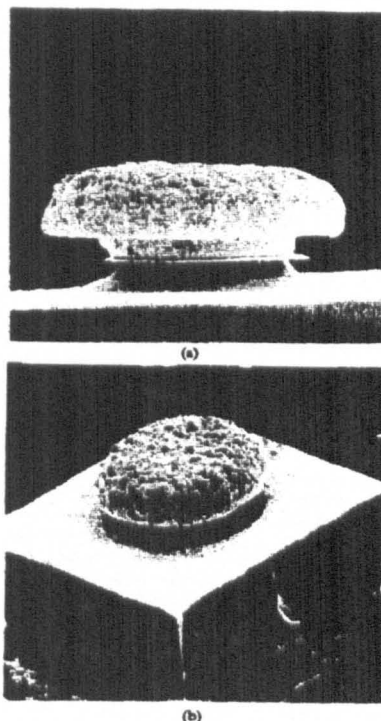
(a) Completed TRAPATT diode. (b) Device with integral silver/gold heat sink.
